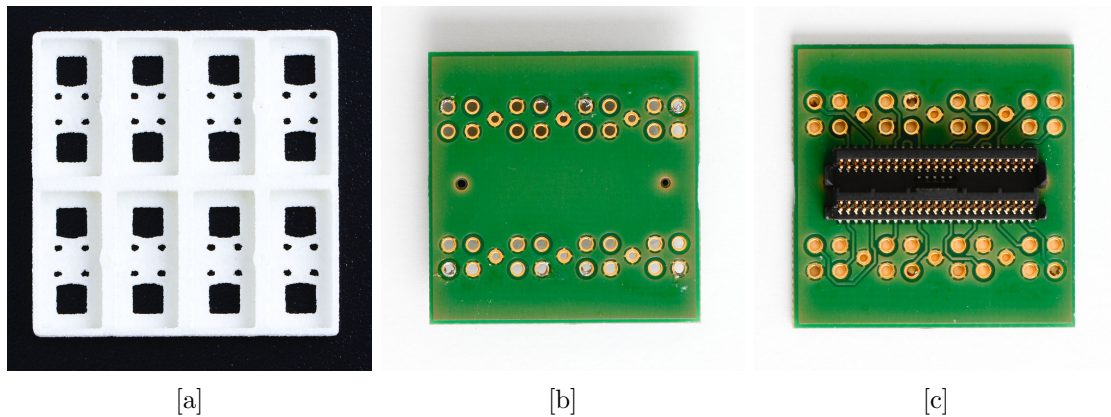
[a] The G-APDs are placed in a tight grid which was produced using a 3D printing technique. [b] Front and [c] rear of the carrier boards which provide the electrical contacts for four pixels each.
